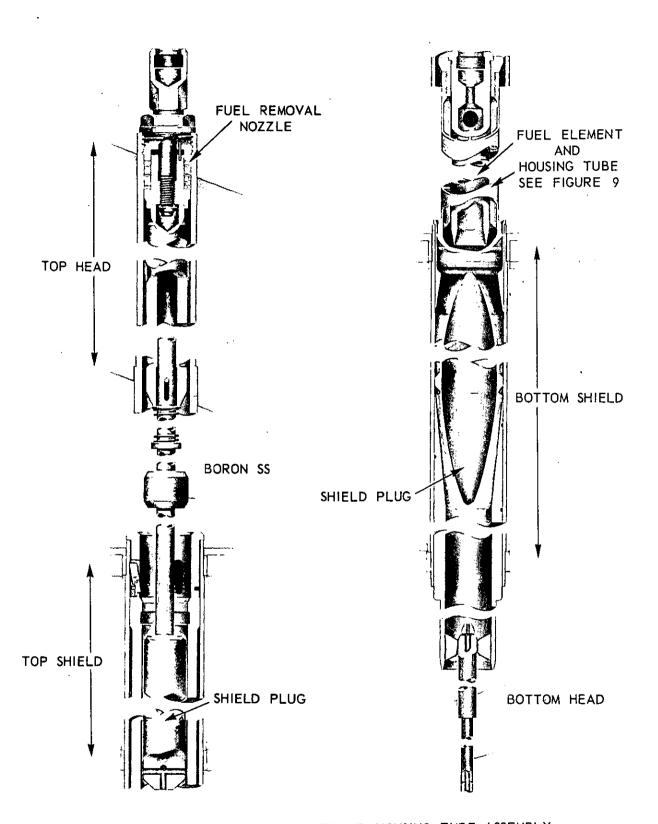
TYPICAL FUEL ELEMENT AND HOUSING TUBE ASSEMBLY
